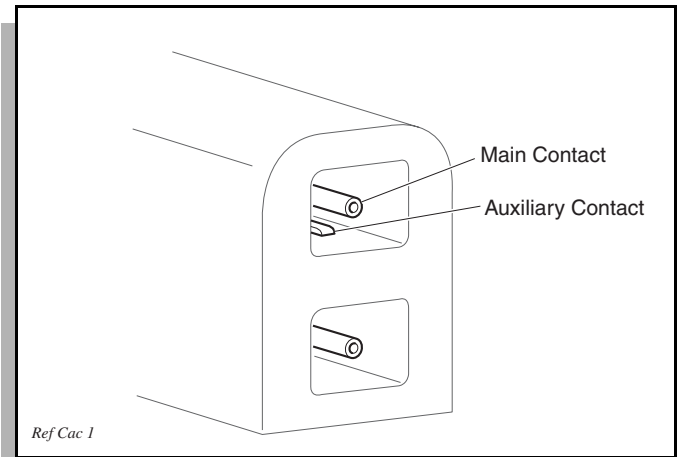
Cleaning Auxiliary Contact in Charger Plug
